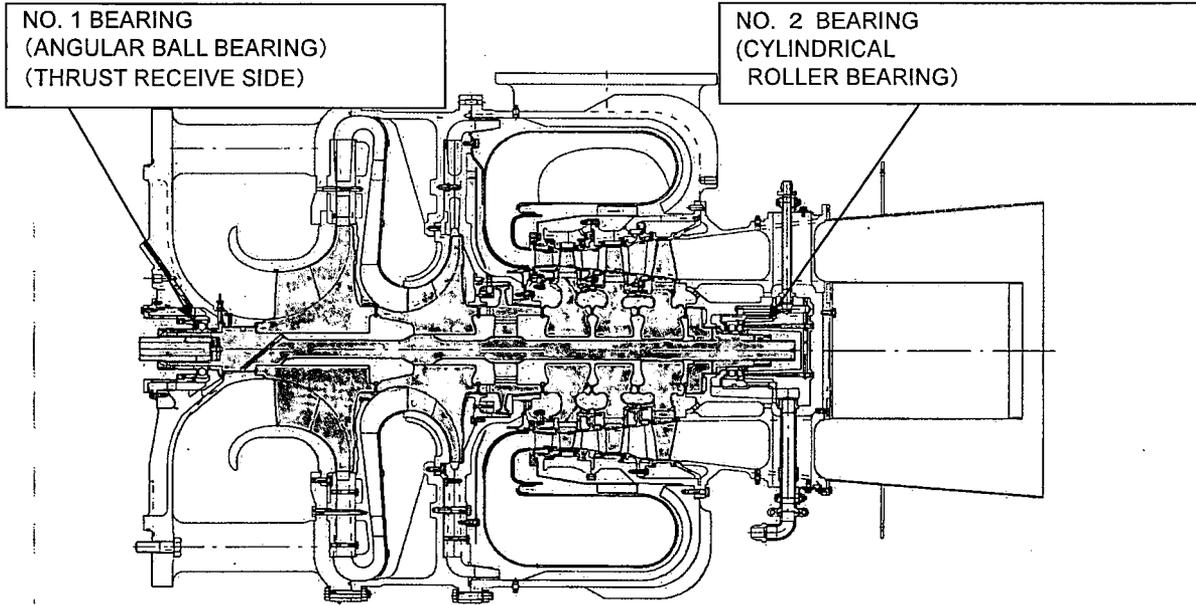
Sectional Drawing of Power Section (Colored Section Shows the Rotor)
